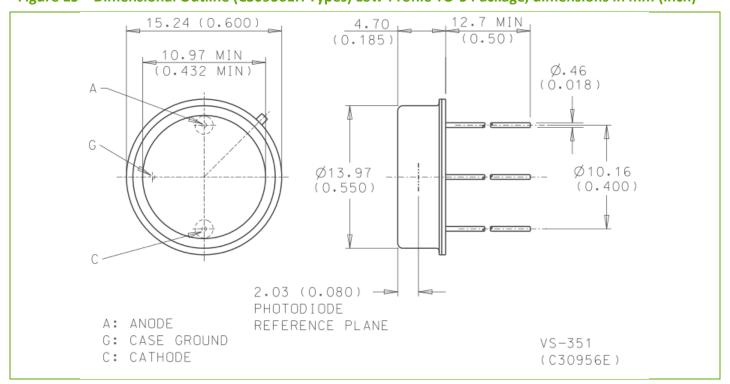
Dimensional Outline (C30956EH Types) Low-Profile TO-5 Package, dimensions in mm (inch)
